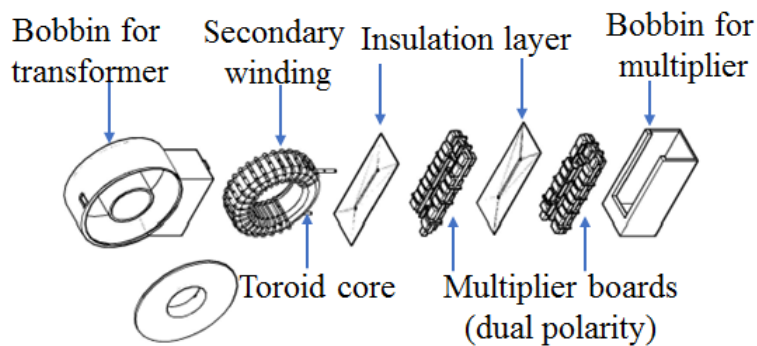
Exploded view of the integrated packaging structure of elementary HV wire-wound transformer and HV multiplier
